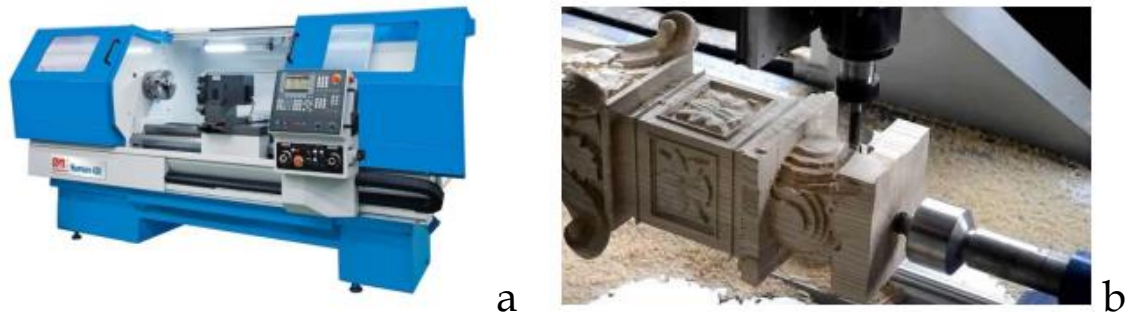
CNC machine tools: a - lathe; b - milling
